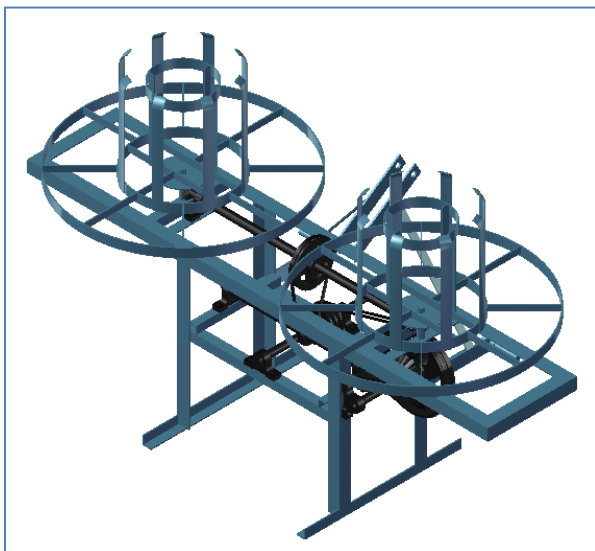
Isomeric view of tractor drawn drip lateral coiler machine
